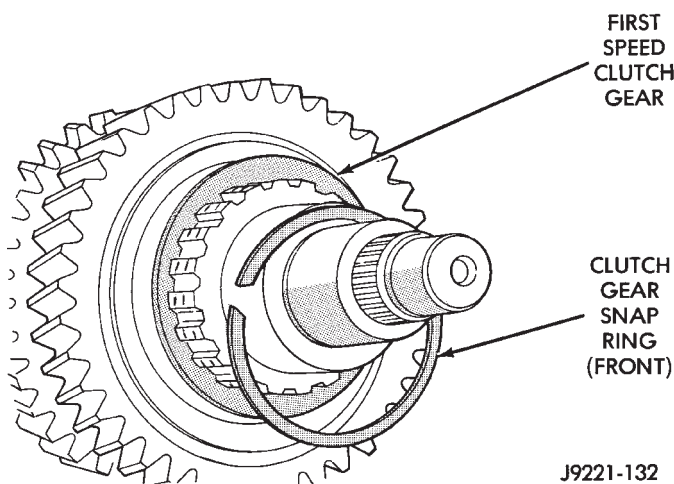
First Gear Clutch Gear Front Snap Ring Removal
